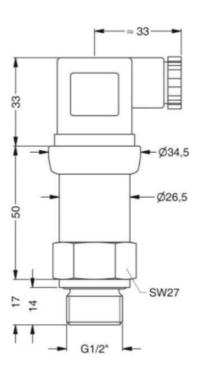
Pressure sensor – mechanical design, threaded joint
